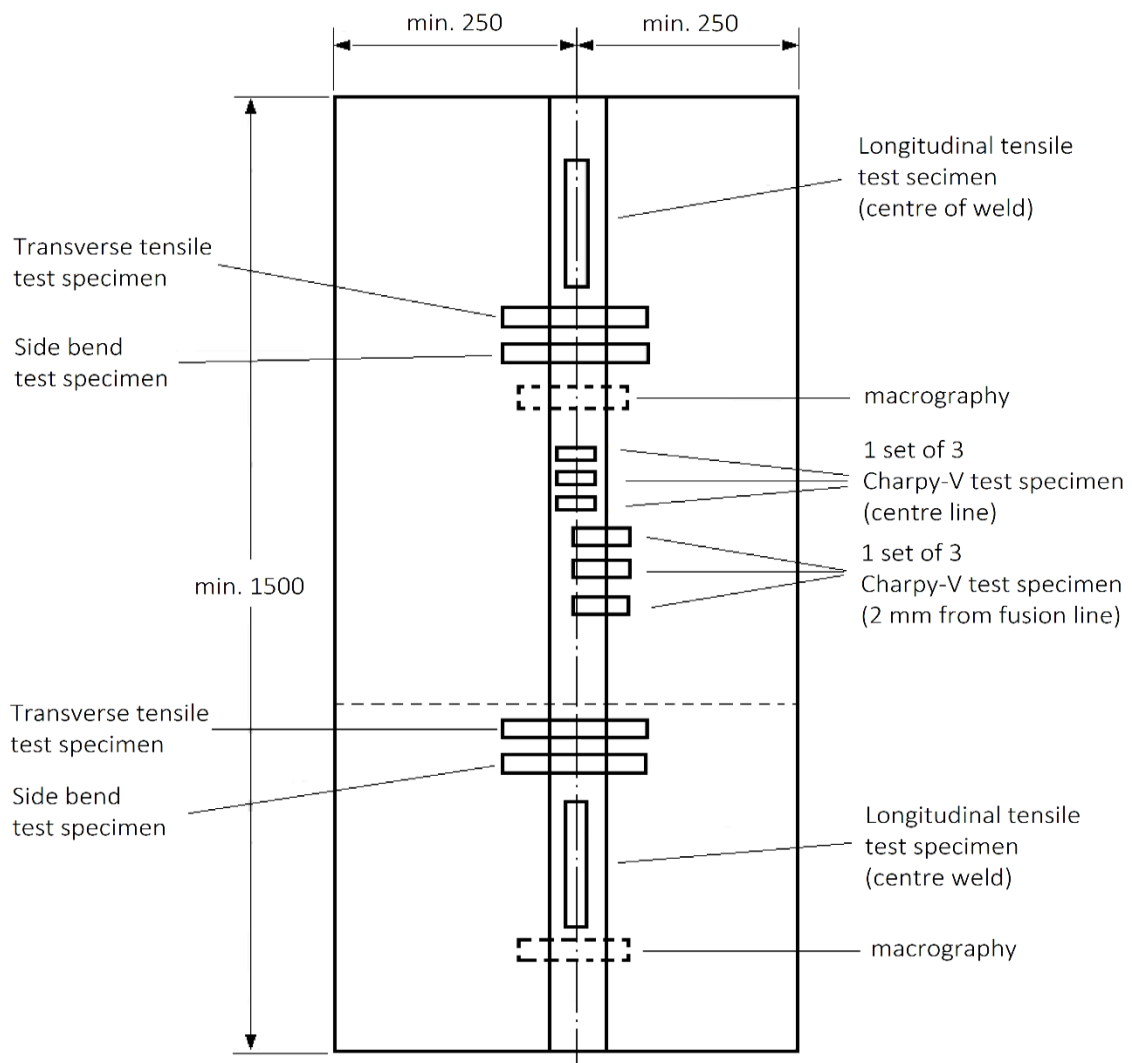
Test piece for electrogas and electroslag welding
